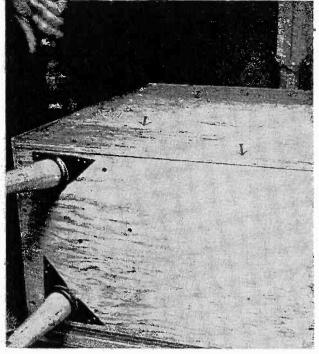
Kimsul and speakers would go in at this point in final assembly. Note screw holes in back panel for piece 5.
